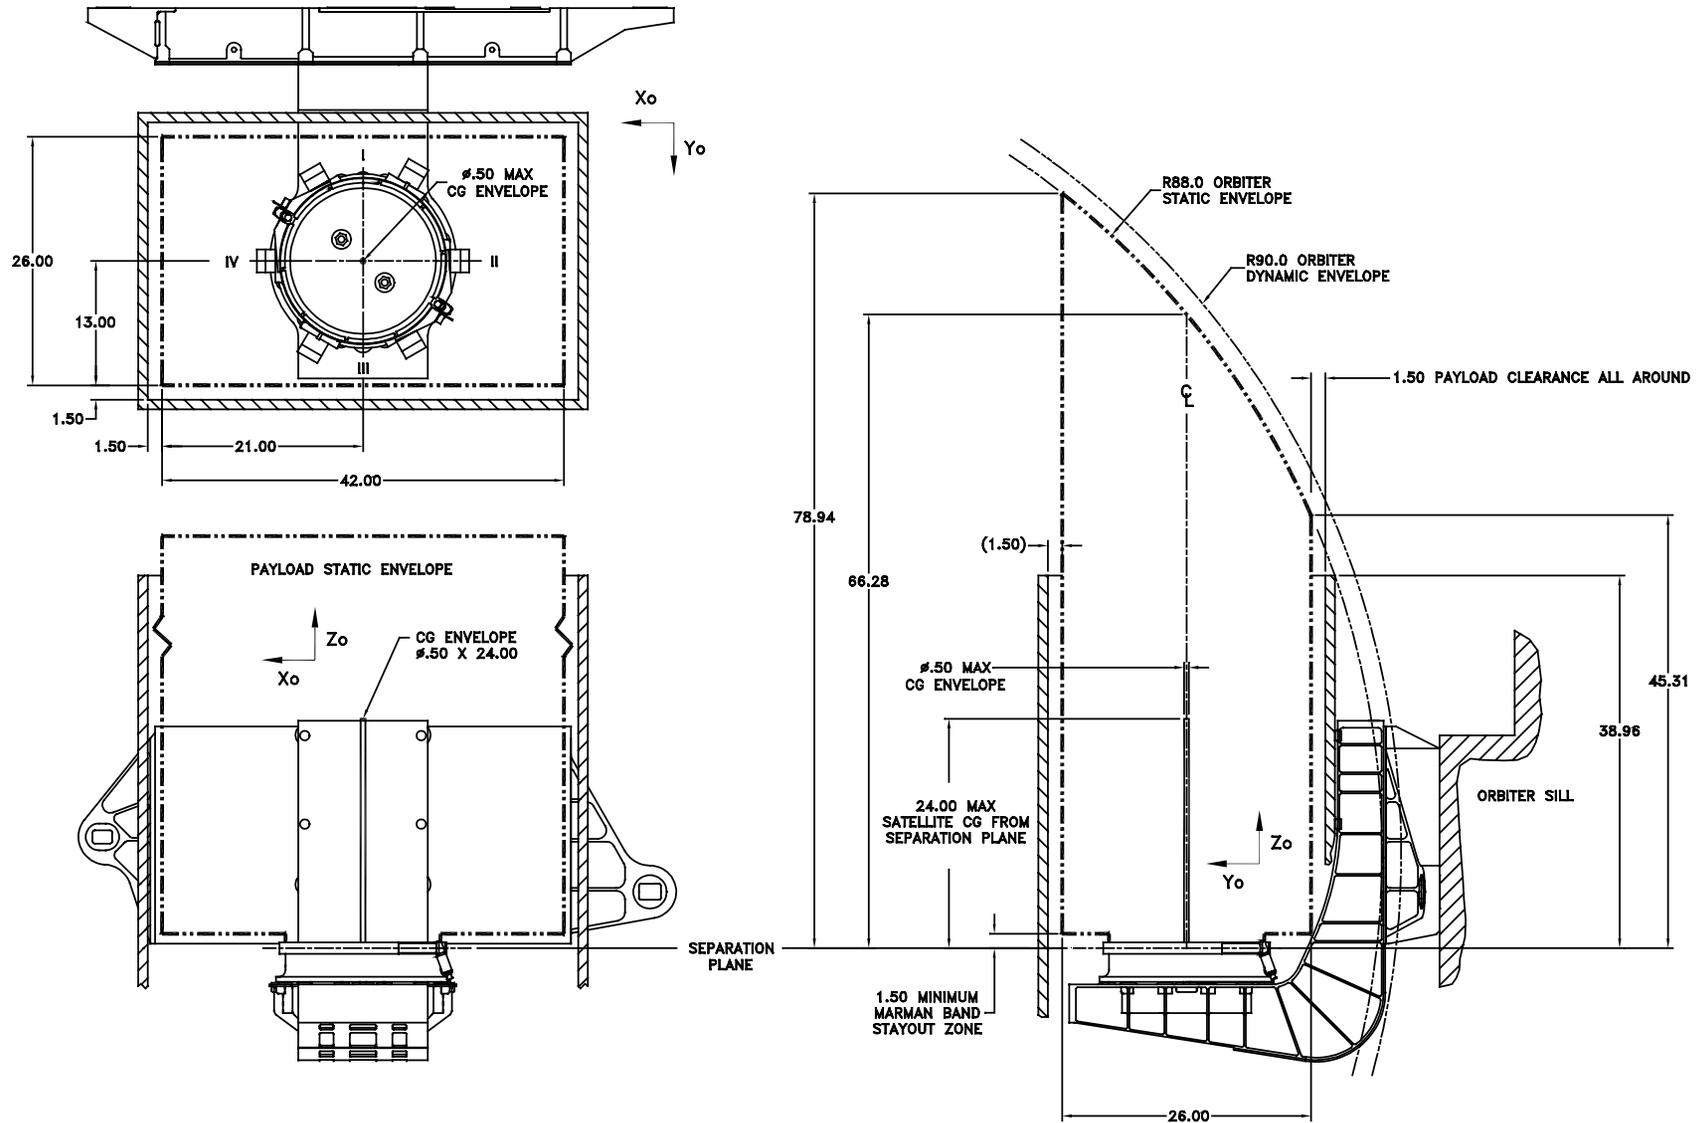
SHELS Static Envelope on the Sidewall Adapter Beam
